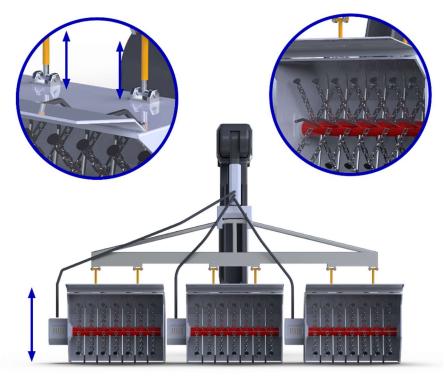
Front view of mechanical demining module, detailed view of height adjustment
